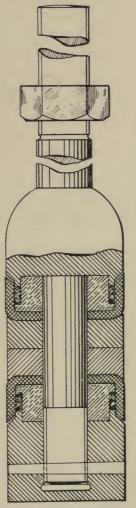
,--PISTON CO2 REFRIGERATING MACHINE, SHOWING LEATHER CUPS.
